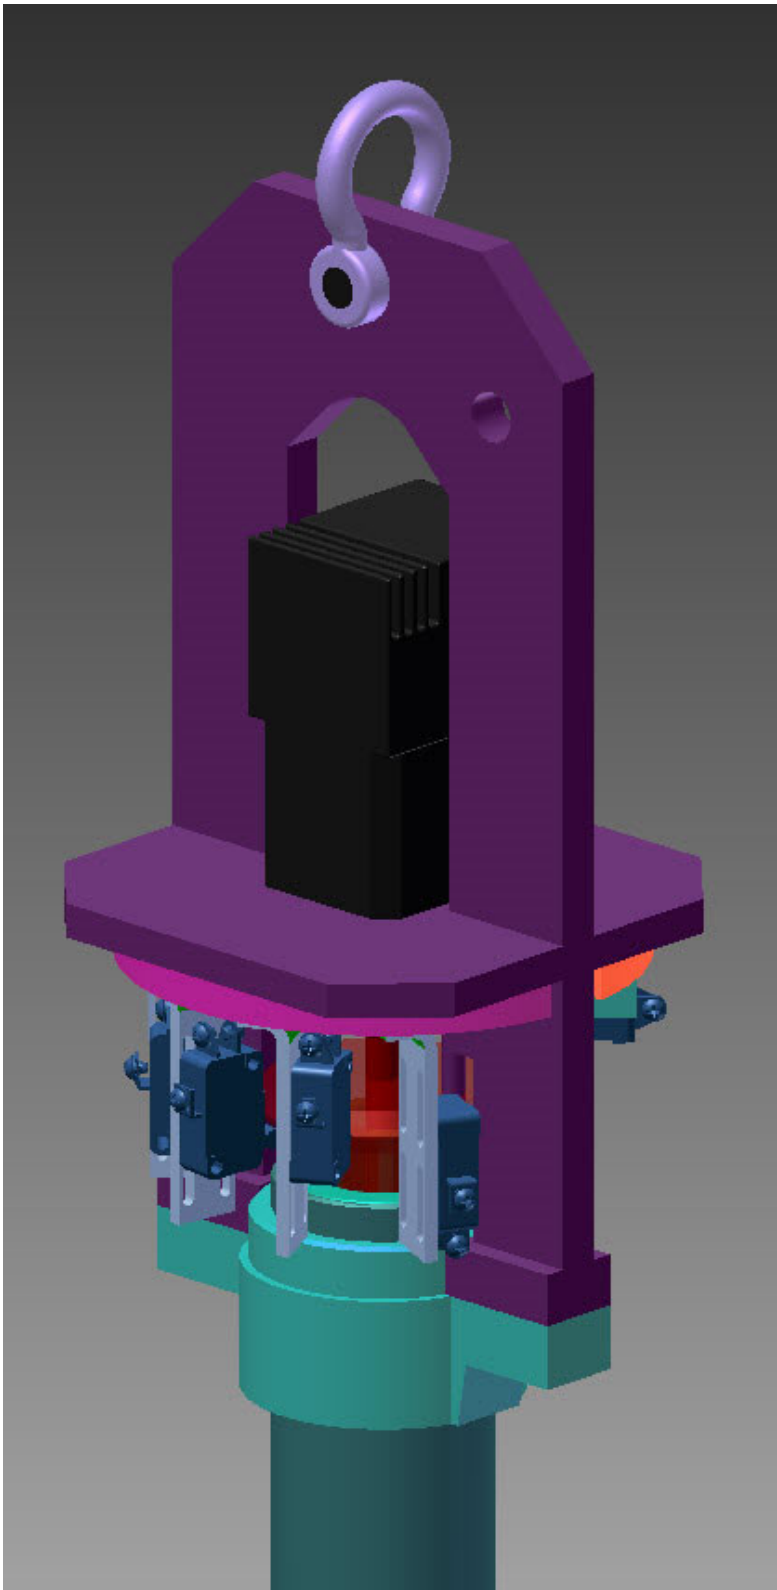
Upper end of the target dipstick, showing the step motor and the micro-switches.
